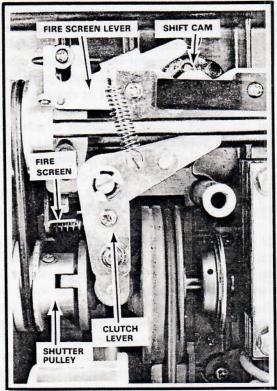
shows the drive mechanism of the Fujica with the clutch engaged to drive the shutter. When the projector is set for still projection the clutch disc is pulled away from the clutch plate. The clutch plate is still rotating but the clutch disc is not. Fig. 18 shows the clutch disengaged for still projection. Comparing Fig. 17 with Fig. 18 you can also see the movement of the fire screen lever. It is not possible to shift to still without the fire screen moving into the light path.
